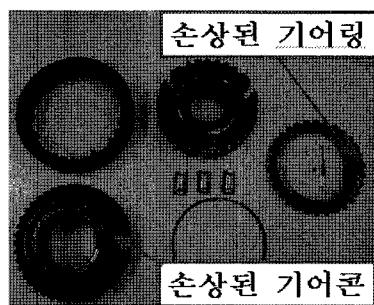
Wear and seizure of synchronizer gear ring and gear cone.
